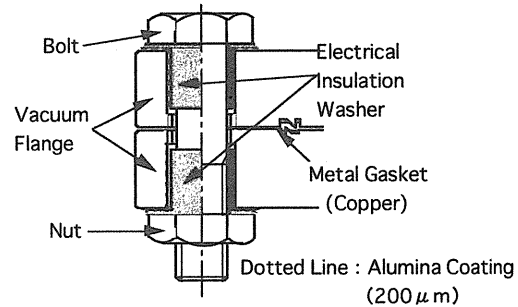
Bolting of vacuum vessel flange with a new electrical insulation washer
